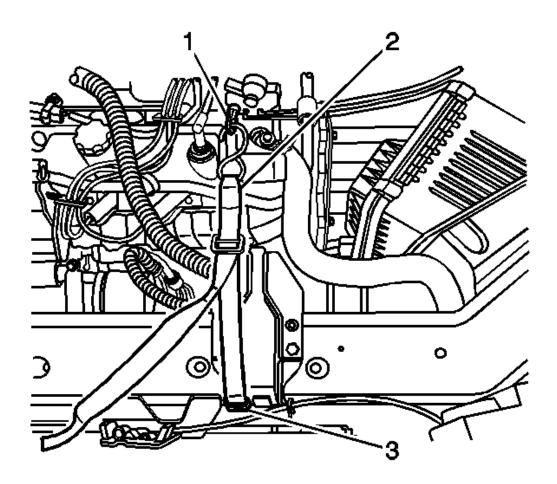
J 41131, Engine Lift Bracket, & Upper Radiator Support Courtesy of GENERAL MOTORS CORP.
